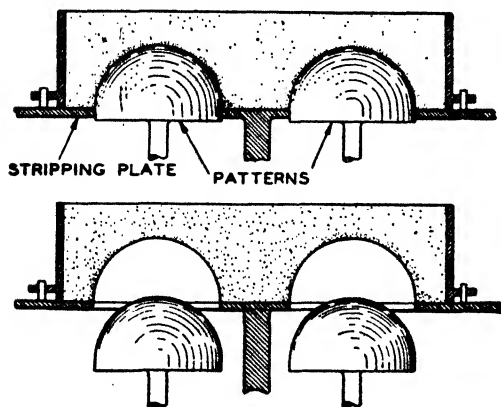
PRINCIPLE OF DRAWING PATTERN ON STRIPPING-PLATE MACHINE
